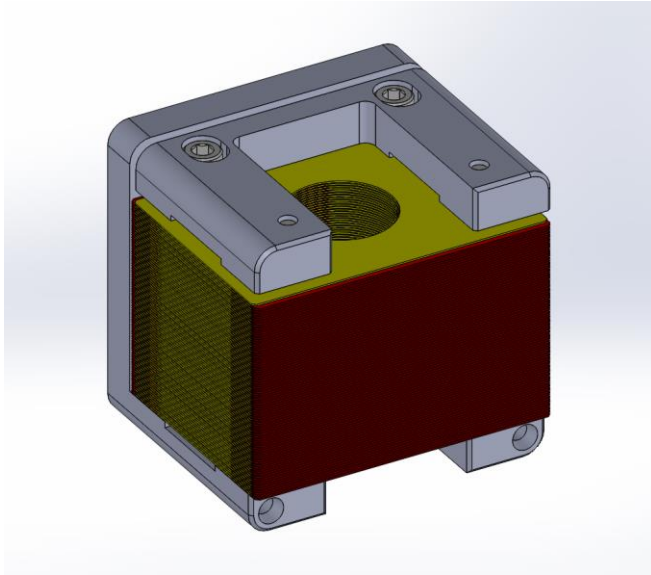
The current target design, also comprised of individual disk holders stacked in a body. In this design the U-shaped holder part can slide outward to open up the coolant gap and release the disks.
